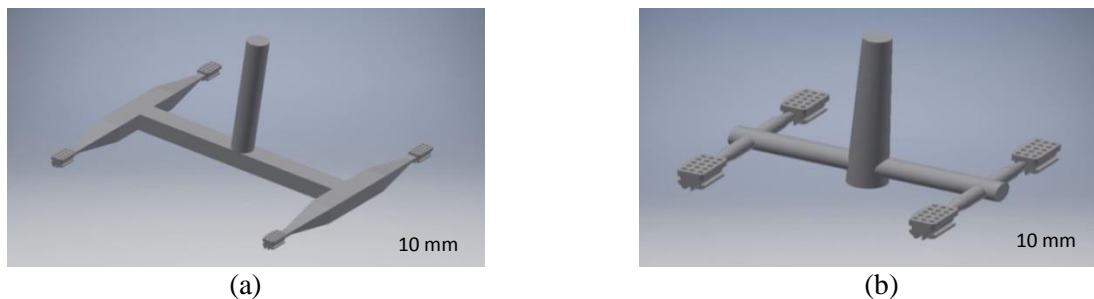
3D Drawing of Bracket and Gating System, a) Initial Design (A), b) Improved Design (B)
